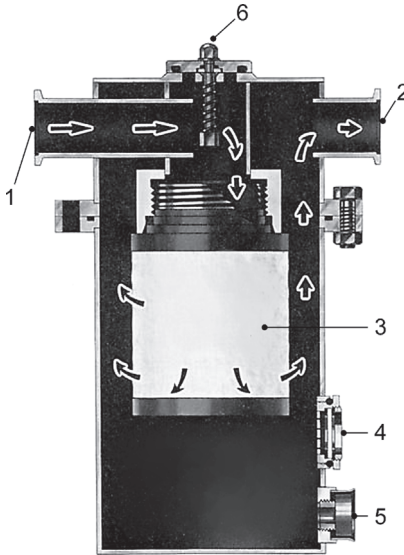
Oil mist separator. 1: connecting flange to pump; 2: oil-free exhaust; 3: filter; 4: oil-level glass; 5: oil drain; 6: overpressure valve.
